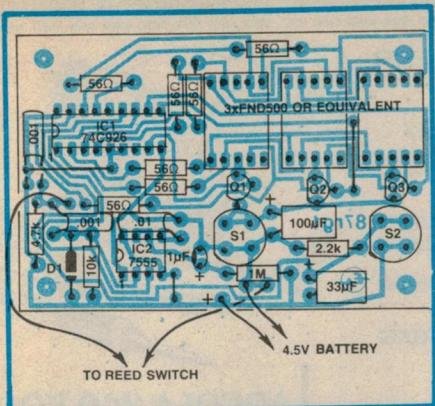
parts layout for the PCB. Don't forget the three wire links and take care when installing the polarised components.
